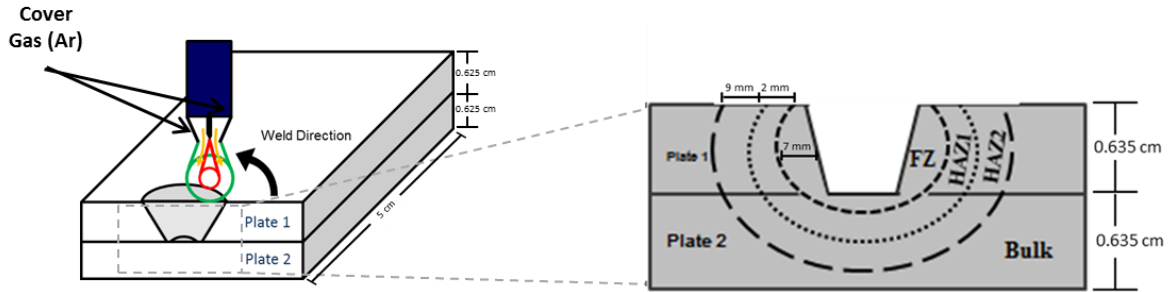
1. Schematic of the TIG welding process and schematic of weld zones, specifying the FZ and HAZs. Far enough away from the weld zone, the sample consists of unaffected base material. All samples were welded through a 45° countersunk hole in order to have full penetration through both plates.
